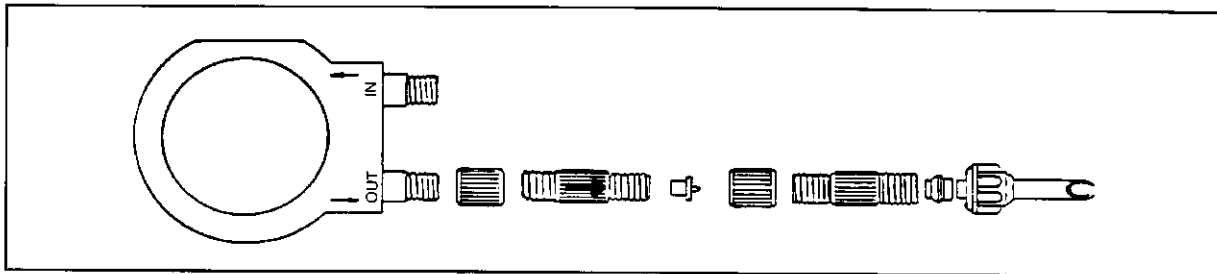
B — STENNER IN-LINE CHECK VALVE (CVDBINL)
